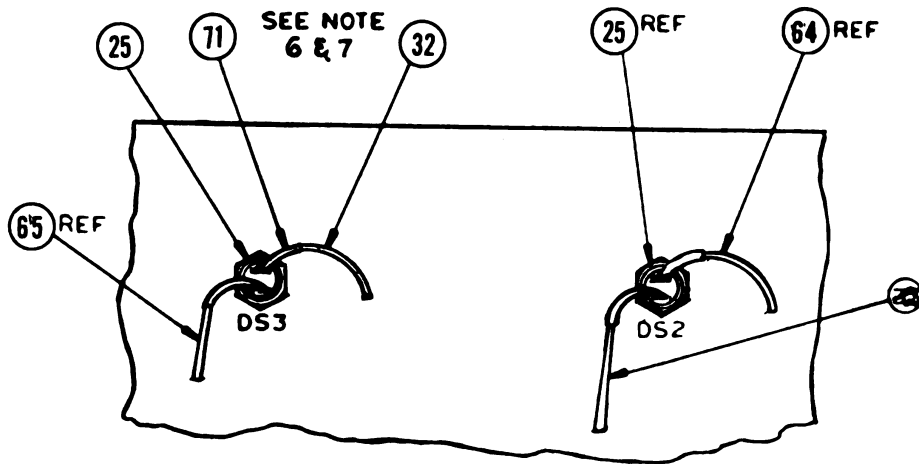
Switchbox Assembly (Sheet 6 of 7)
